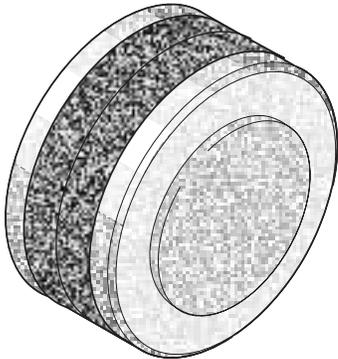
Snubber Diffusion/Dust Seal Assembly
